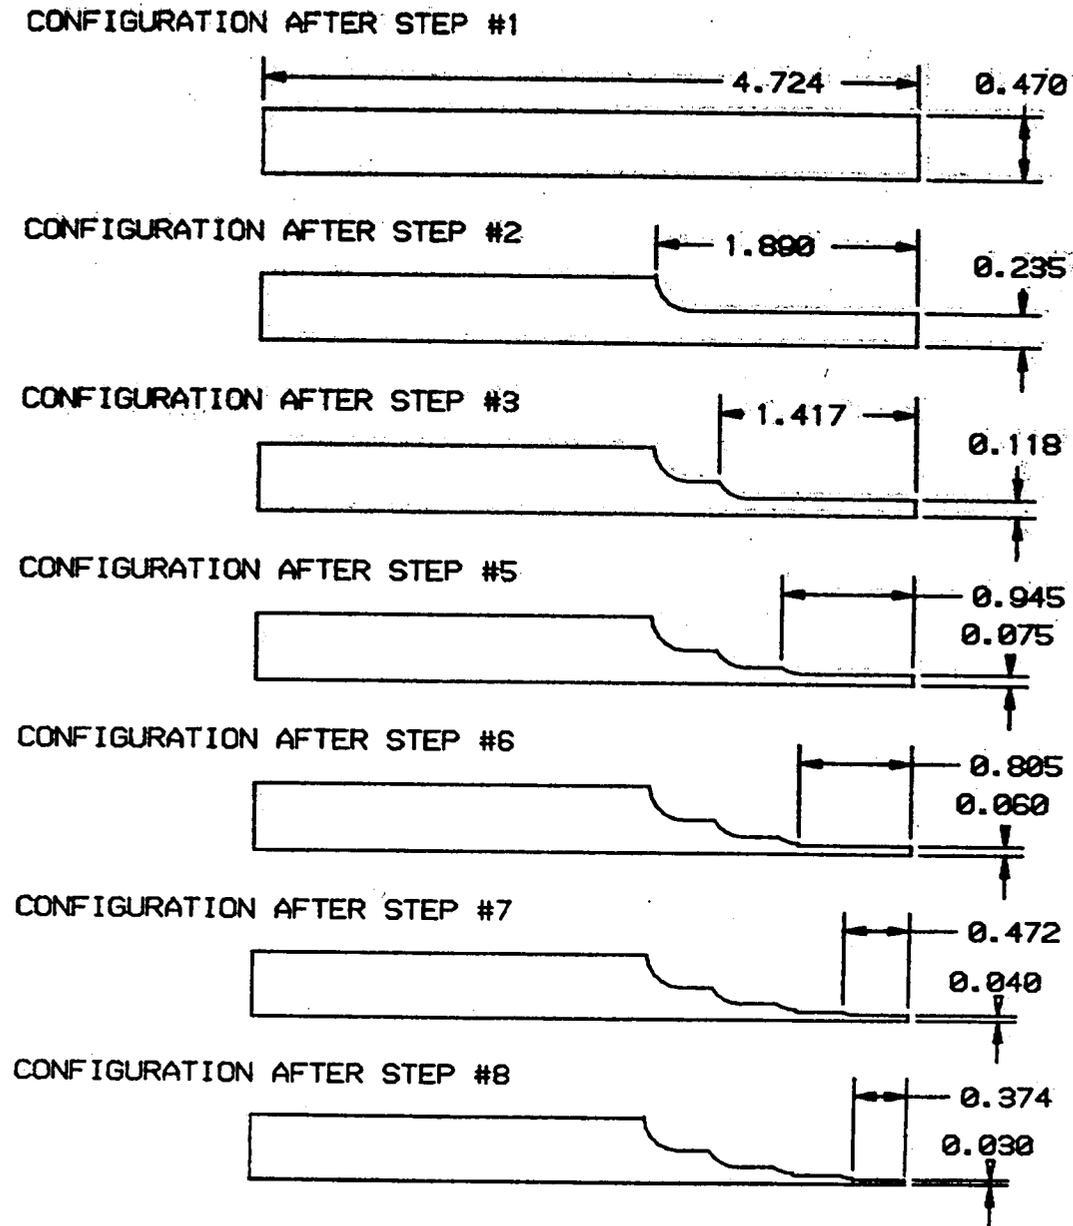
DIMENSIONS AND PROFILES OF STEPPED SPECIMENS AFTER INDICATED MACHINING STAGES
